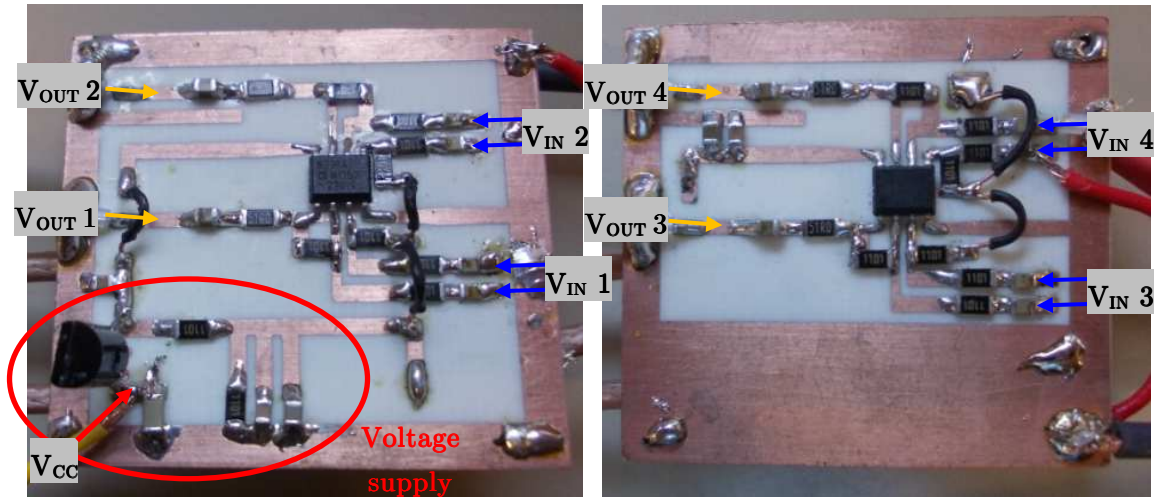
Final PCB top (left) and bottom (right) designs.
